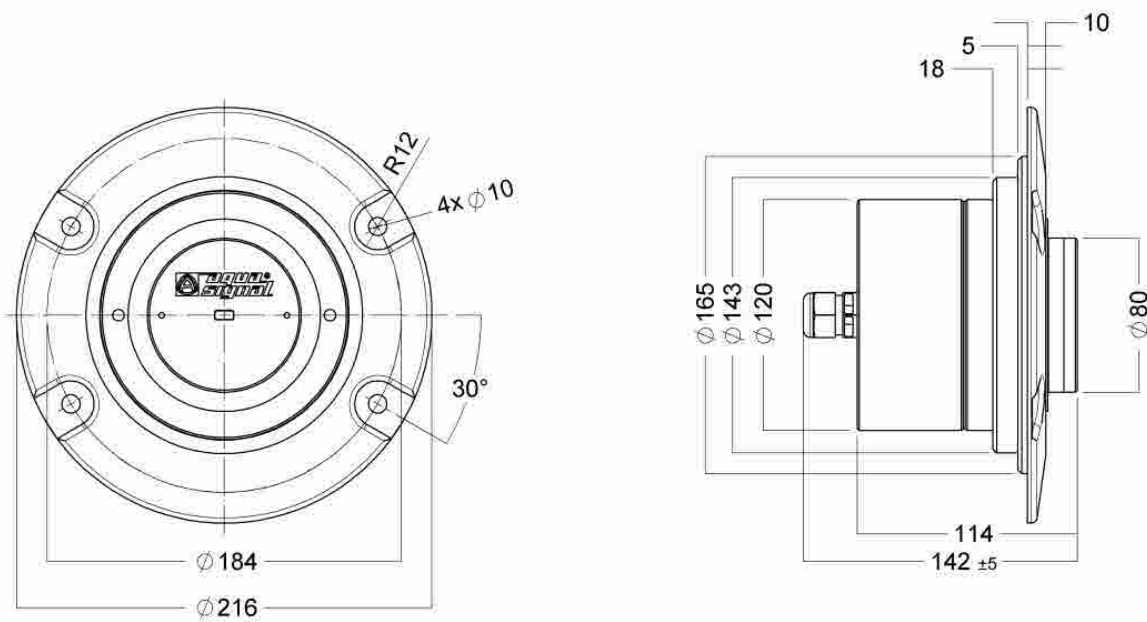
Explosion-proof luminaire Type HX55-P, recessed mount
